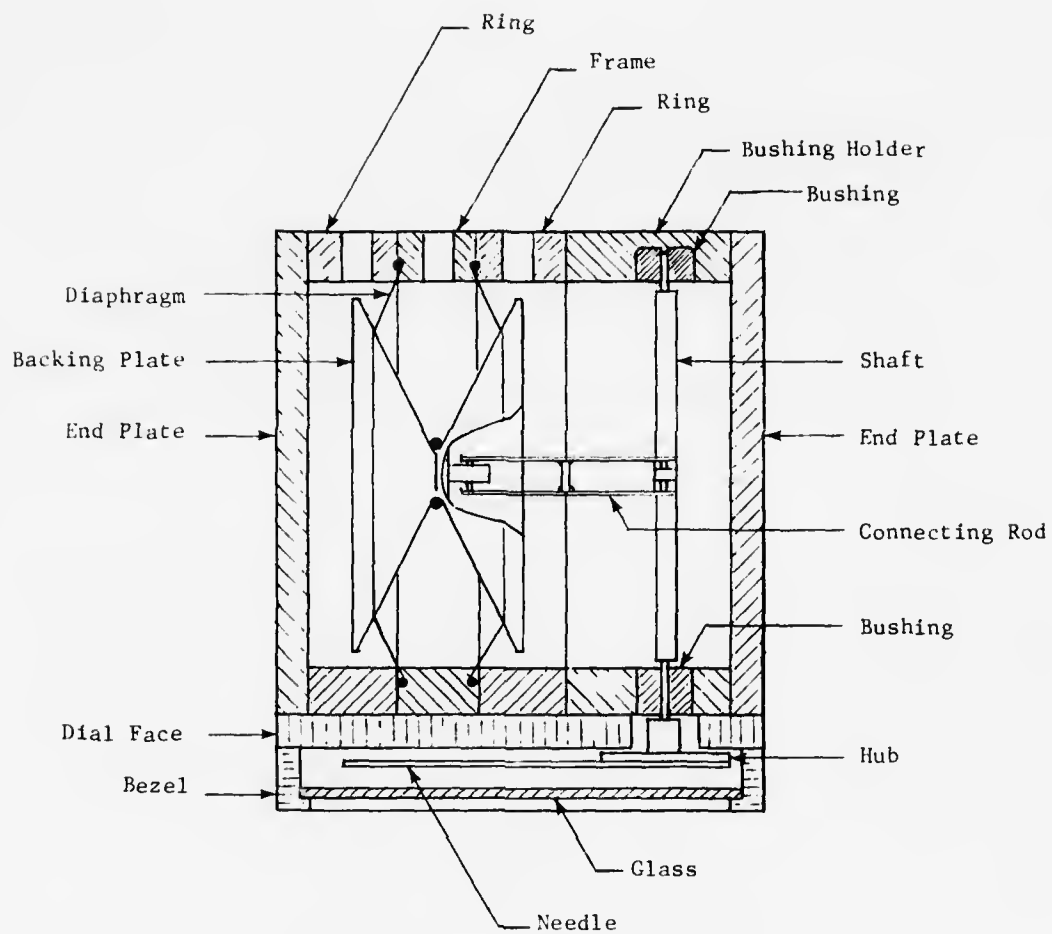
Assembly Drawing of Pressure Coefficient Meter
